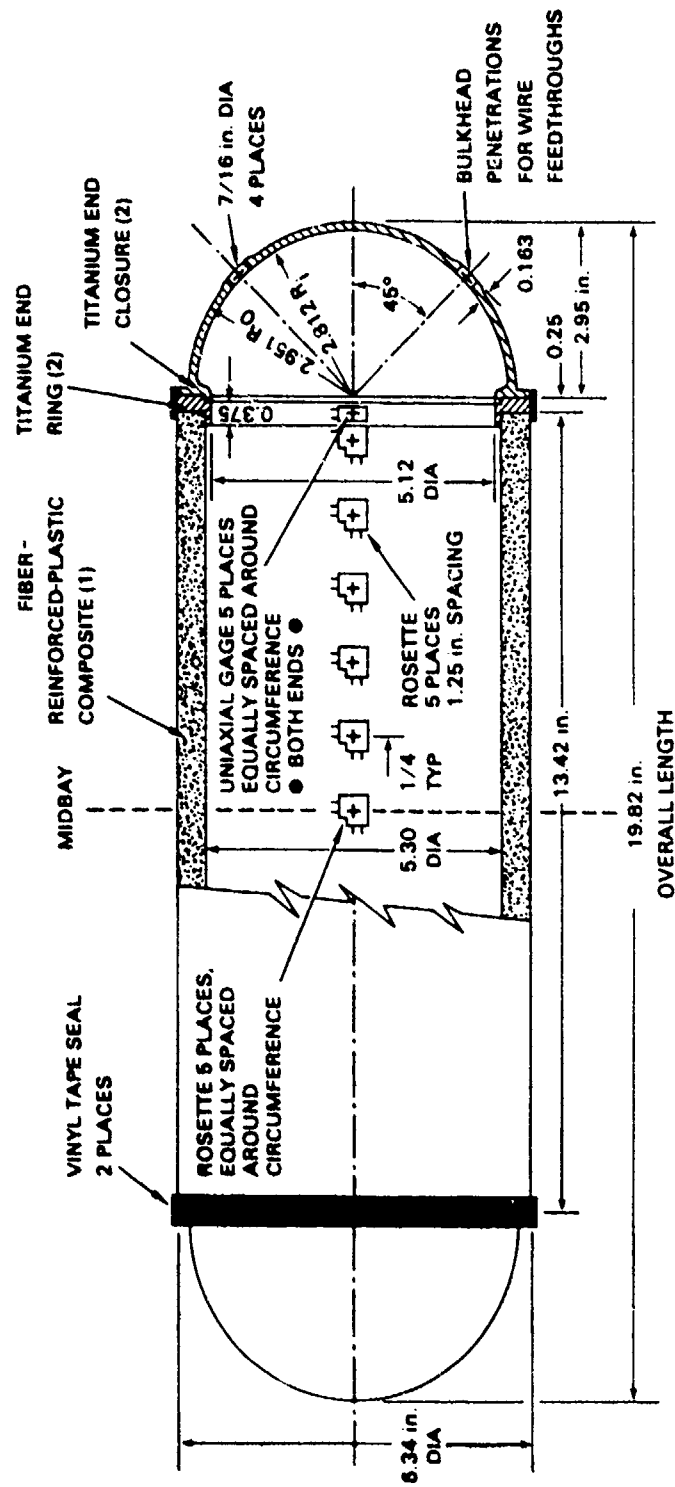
Location of strain gages on AUSS model-scale housing assembly.
